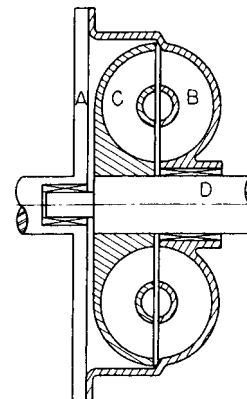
Fluid coupling. (A) Flywheel; (B) impeller; (C) runner; (D) output shaft.
